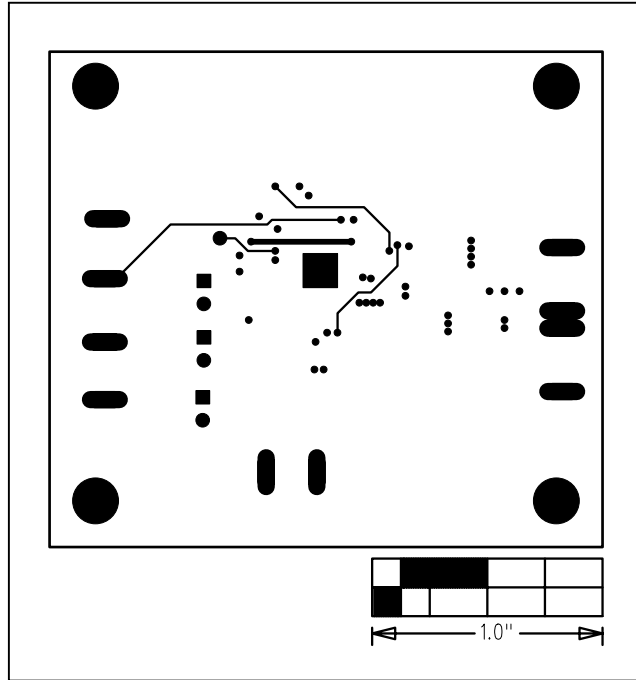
MAX15015A EV Kit PCB Layout—Solder Side
